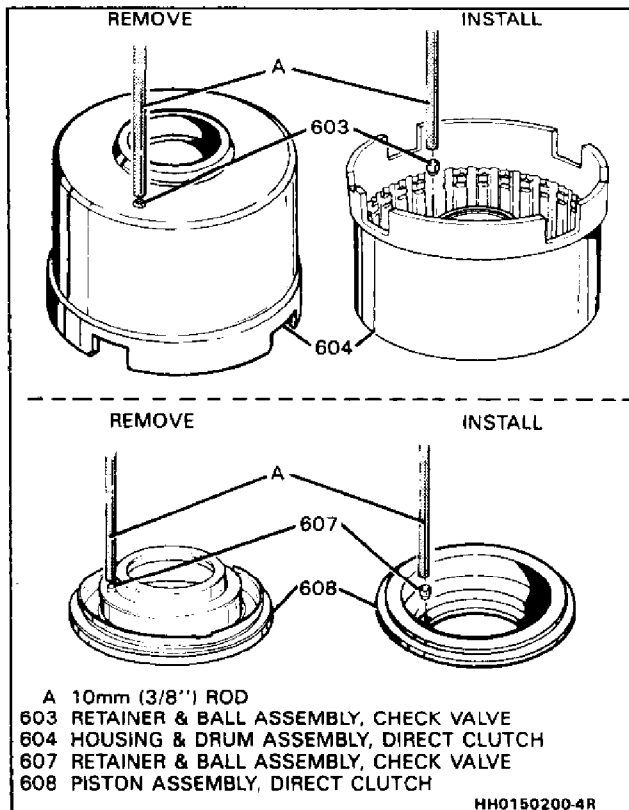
Removing and Installing a Check Valve Retainer and Ball Assembly
